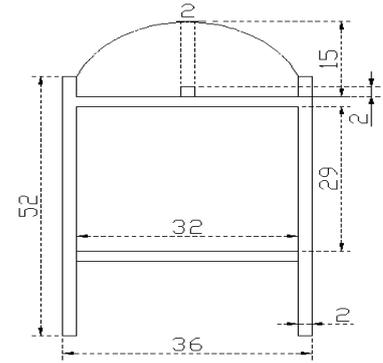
2 View drawing of Test stand (Dimensions in Inches)
